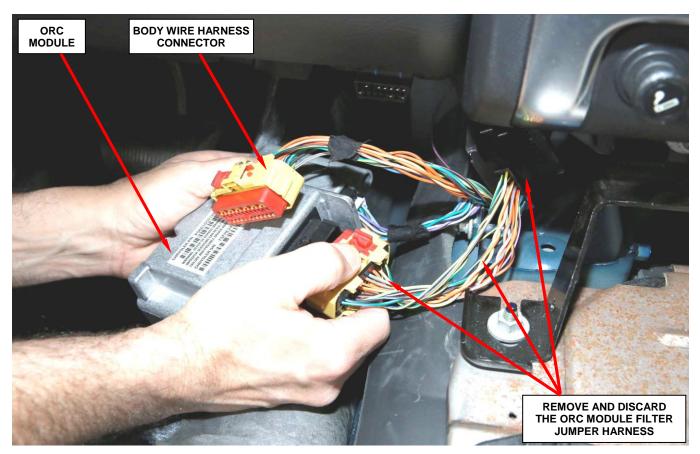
Disconnect and Discard the ORC Module Filter Jumper Harness
